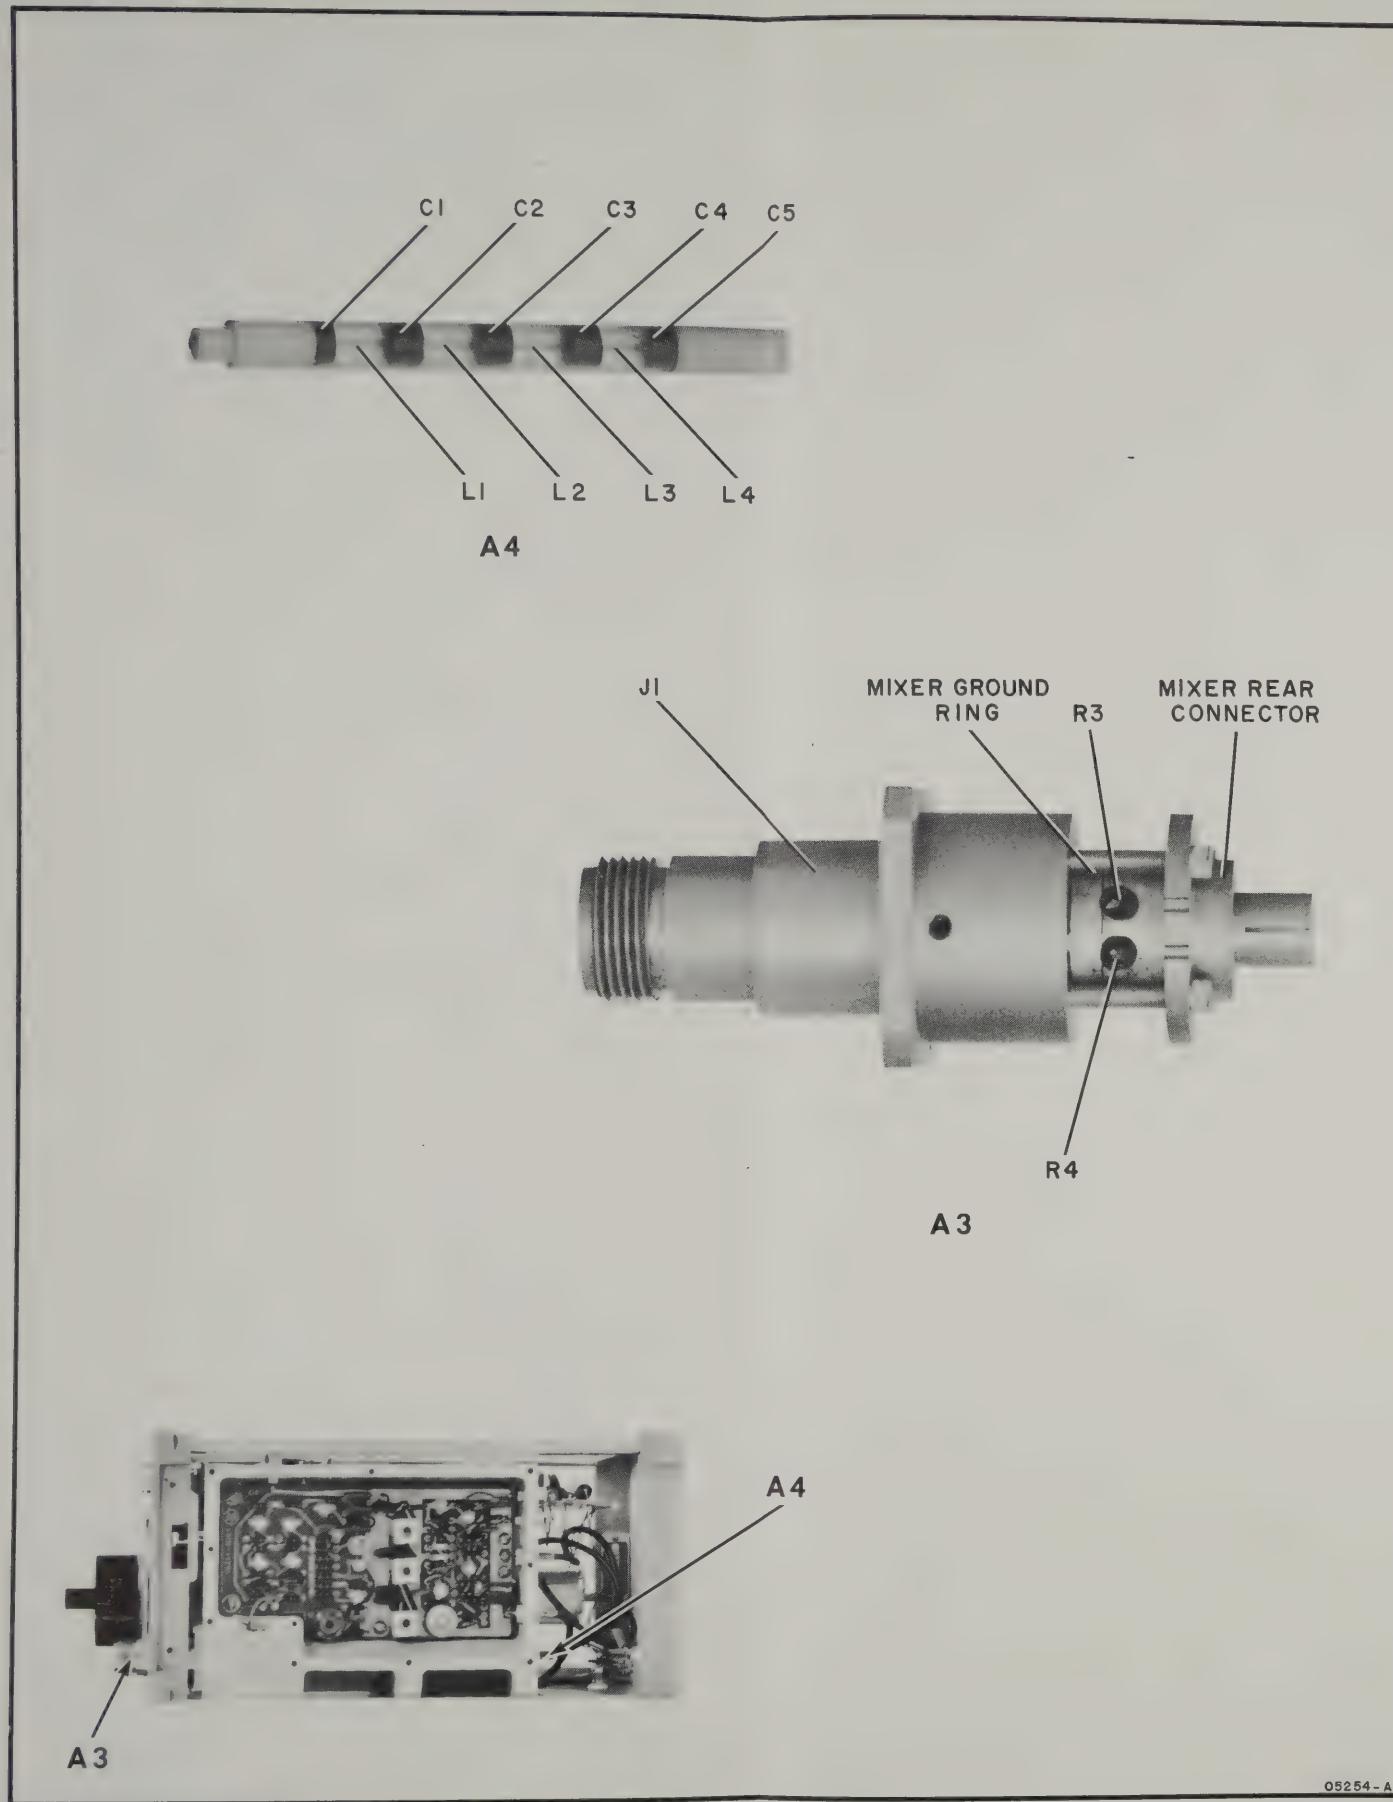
Filter Assembly A4, and Mixer Assembly A3, Component Location
